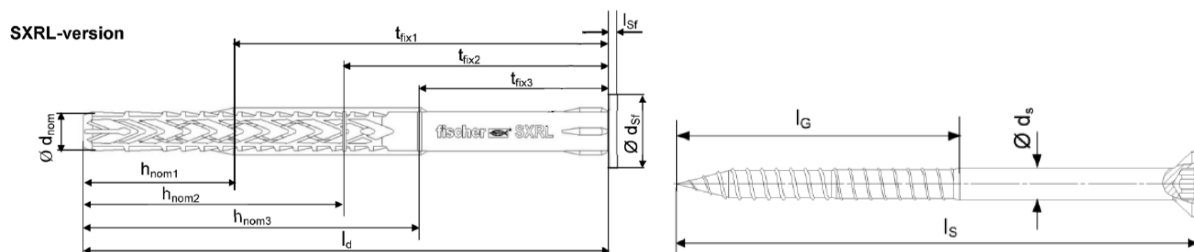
Technical drawings of the anchor sleeve and special screw.
